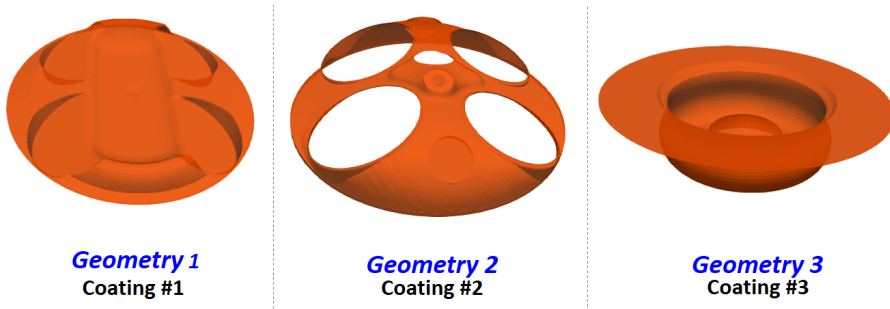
Engine geometries on which coating materials are applied. Geometry 1 corresponds to a piston of a SI engine, geometry 2 to the cylinder head of a SI engine and the geometry 3 to the piston of a Diesel engine.
